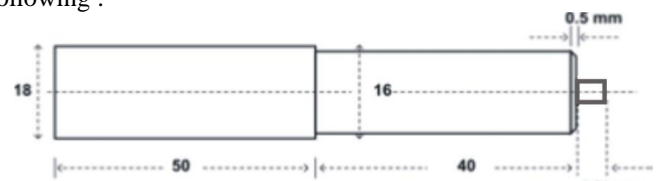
Friction stir welding straight cylindrical tool.
